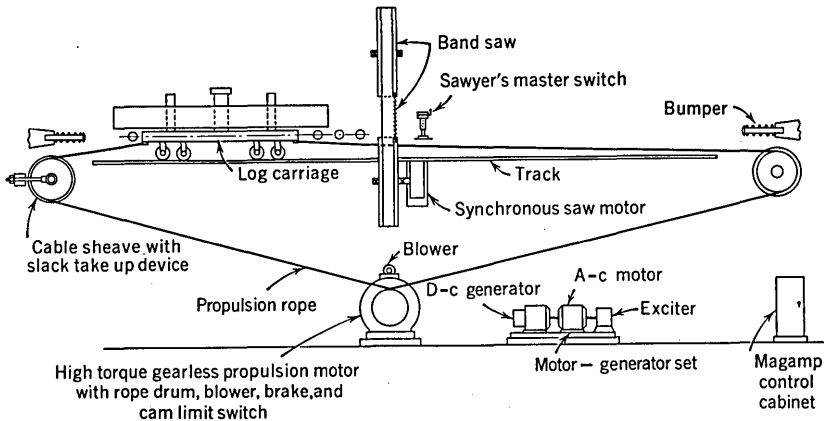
Diagram showing principal parts of a gearless electric log carriage drive
